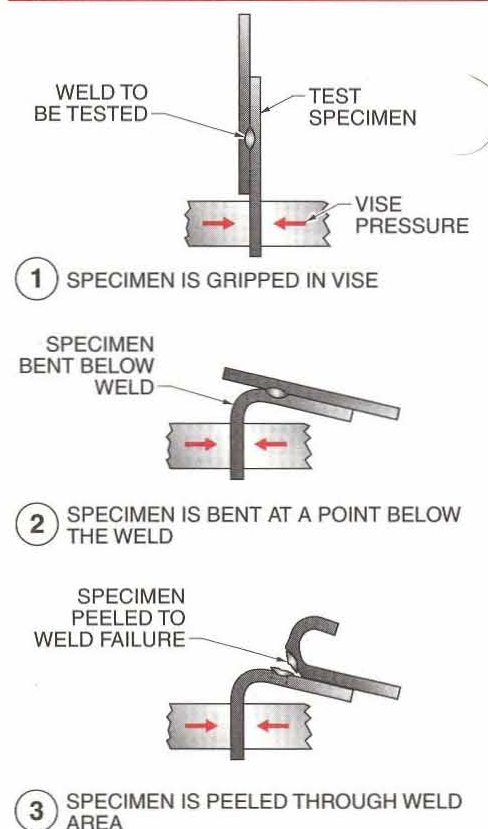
A peel test is an inexpensive alternative production control tool for testing shear strength in a weld joint.
